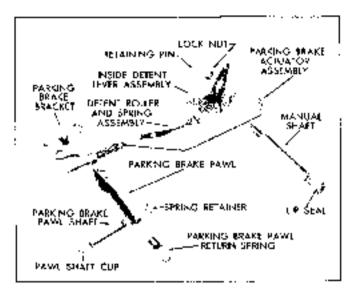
E-121 Exploded View of Manual and Parking Linkage
